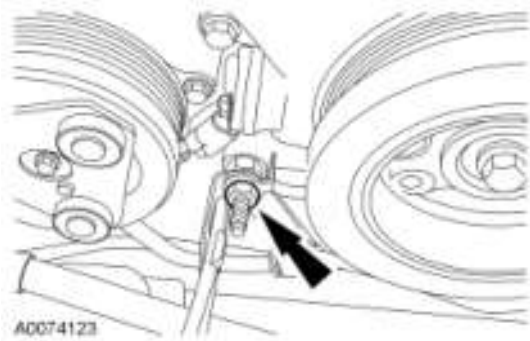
Disconnecting Power Steering Pressure Tube
